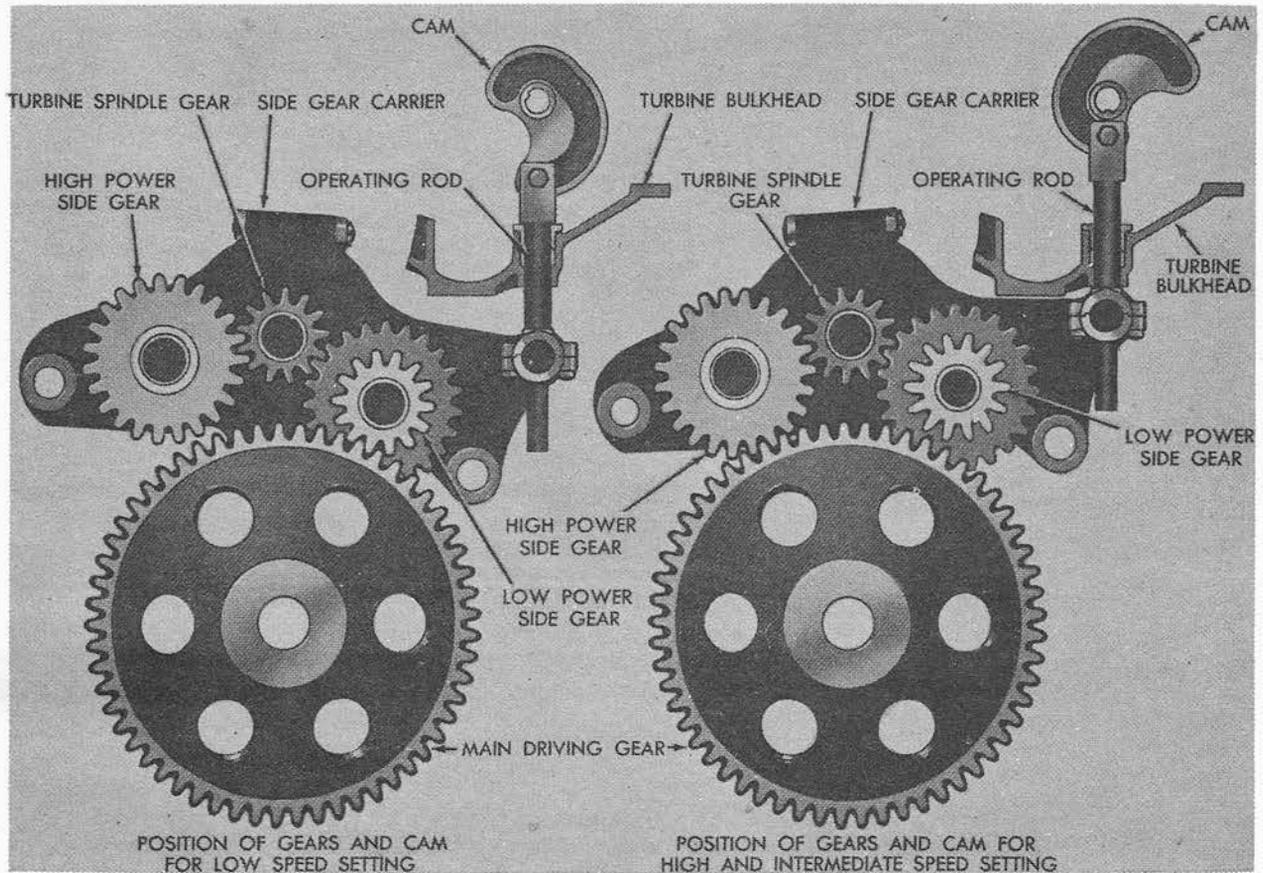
E5.—Speed-change mechanism, showing positions of gears and cam.
